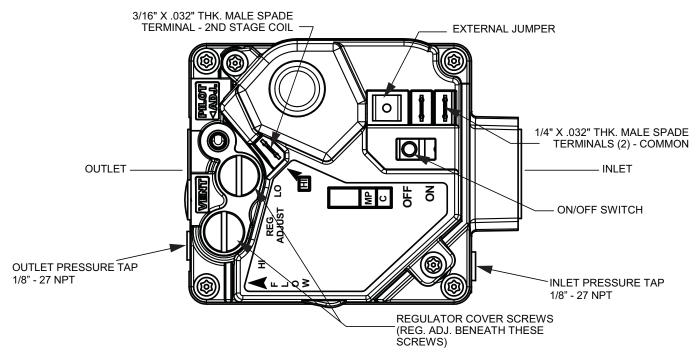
6 Thru 12.5 Ton 3/4" Two Stage Gas Valve
